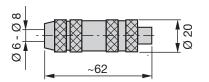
Connector BKS-S105-00 (pin) for BUS OUT
